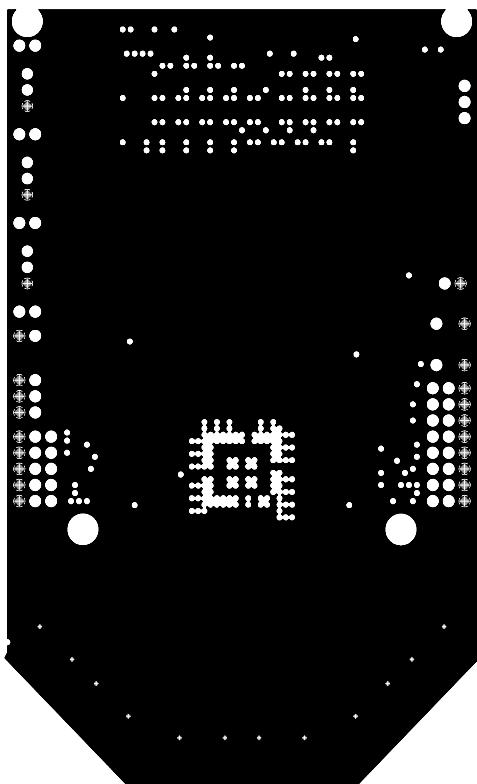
Si5100-EVB Layer 2—GND1 Plane (Daughter Card)
